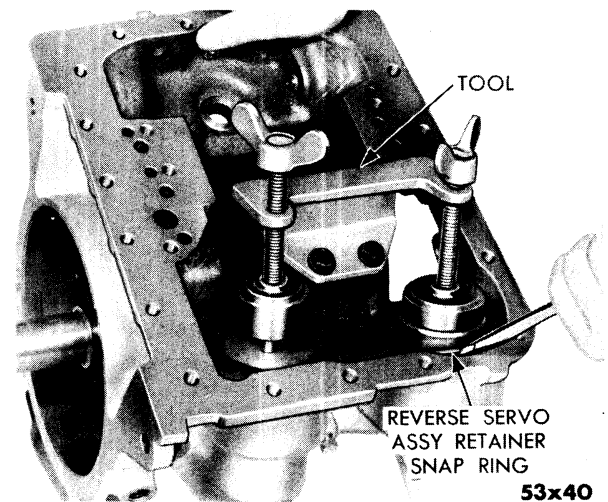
Removal and Installation of Reverse Servo Assembly Retainer Snap Ring
